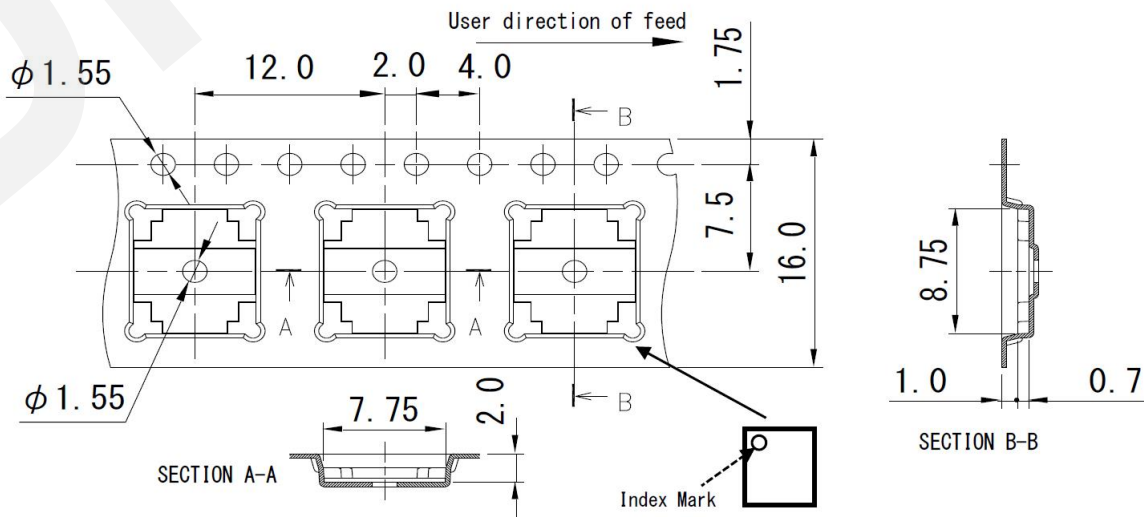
all-FBGA Embossed Carrier tape Dimensions (Unit: mm)
